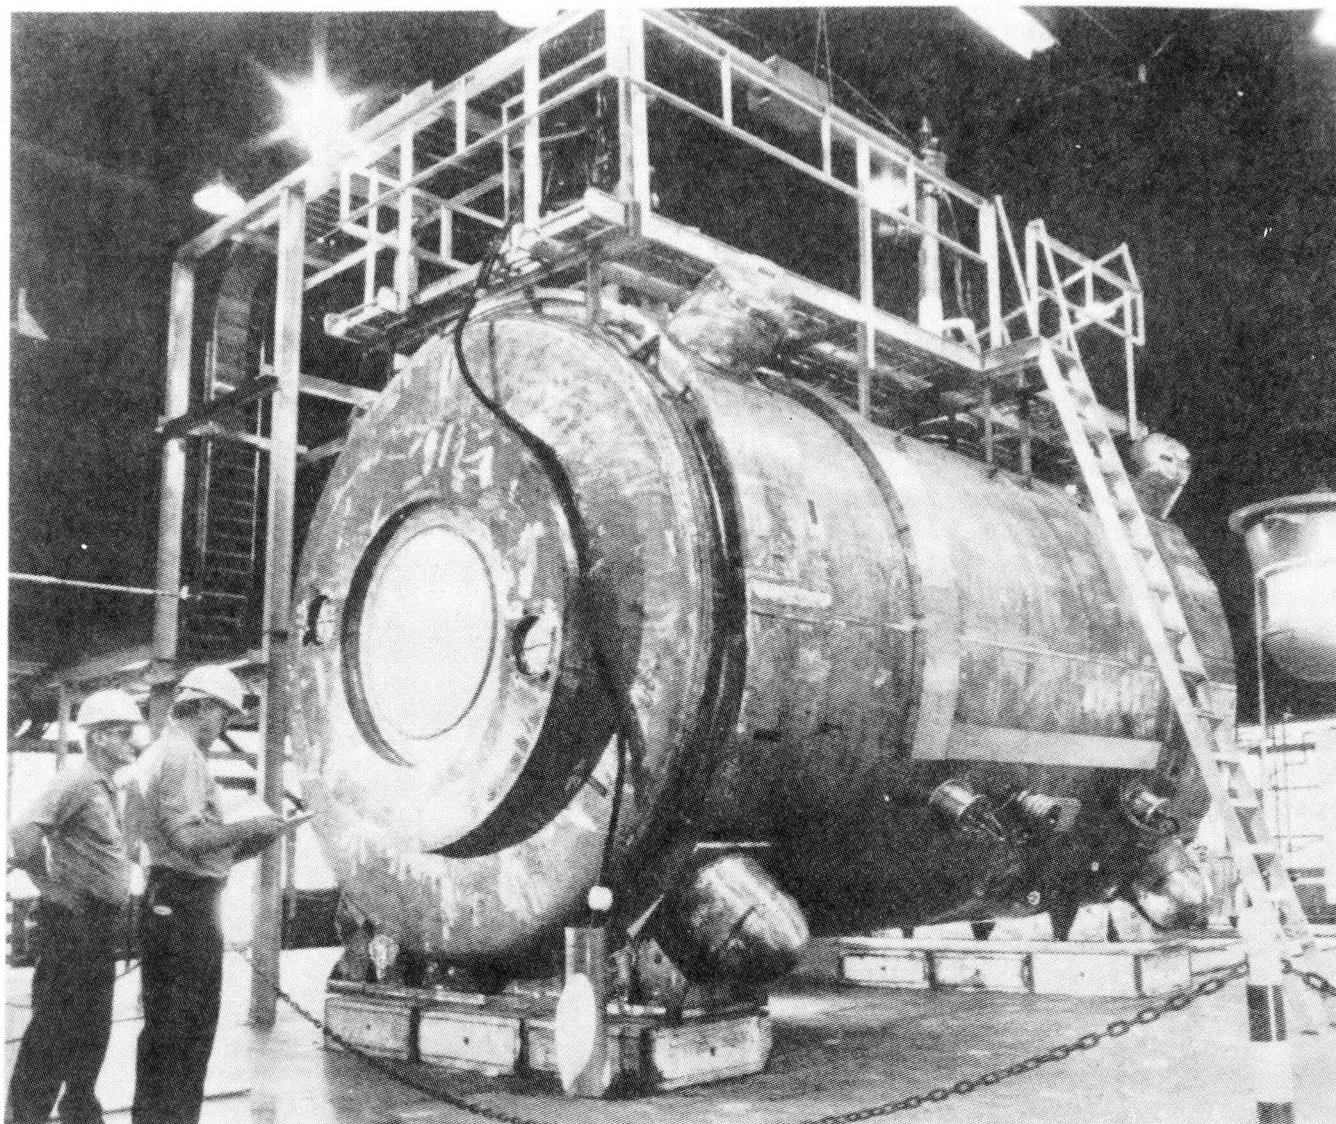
Final cryostat assembly at ANL for the SCMS-2.
